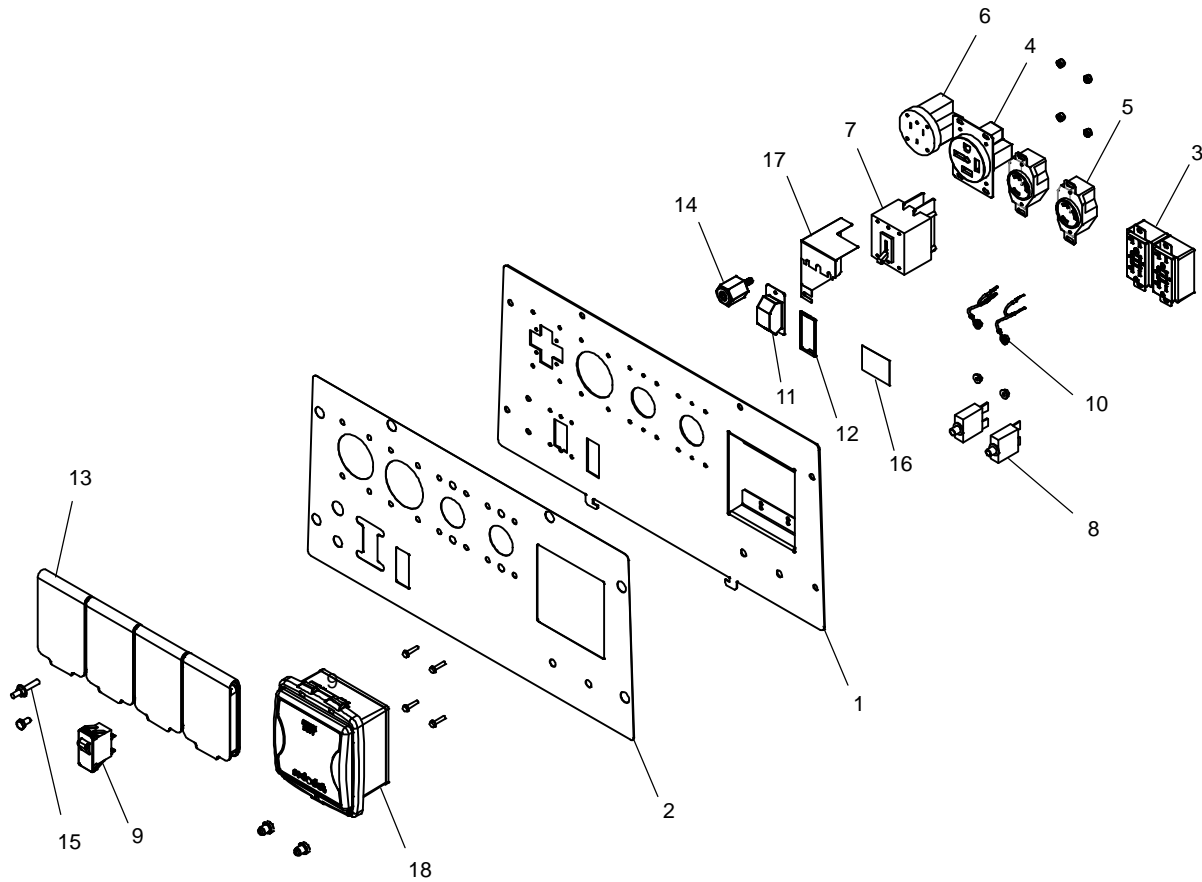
Panel, Weld Output, 600 Models
